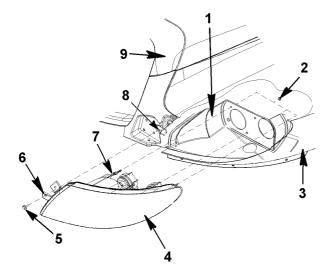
Headlight Assembly Remove and Install (Driver Side Shown)
